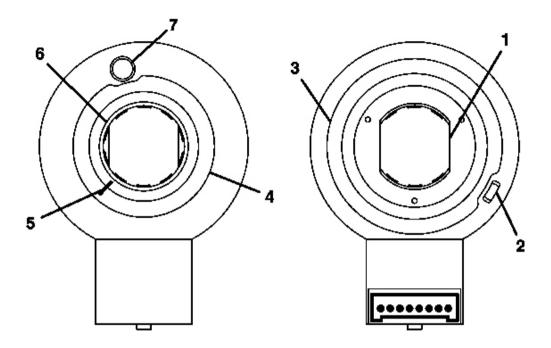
Steering Wheel Position Sensor Identification Points Courtesy of GENERAL MOTORS CORP.
